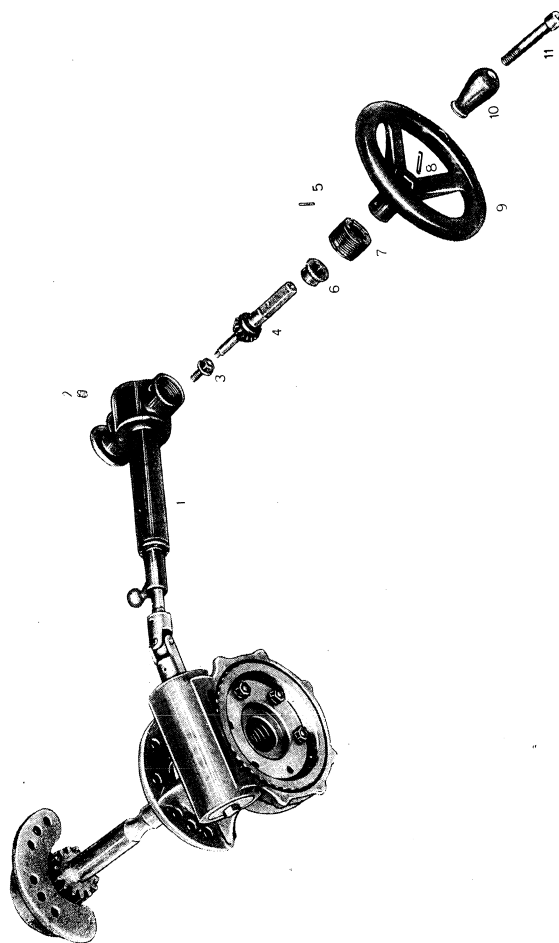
ELEVATING MECHANISM WHEEL — DISMANTLED
